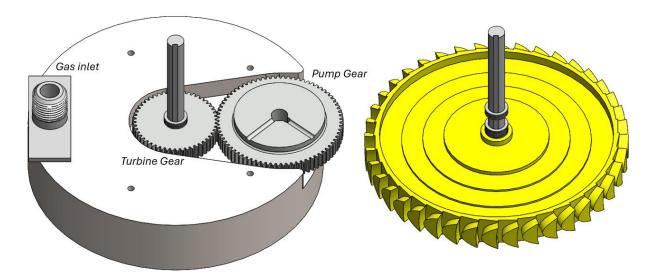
Turbine assembly, with manifold (left); and without, revealing the rotor (right)
